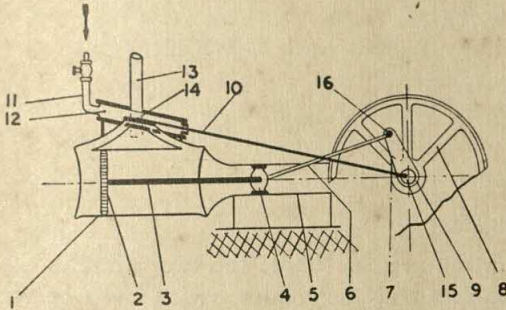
Reciprocating Steam Engine with Link Mechanism for Movement of Slide Valve
